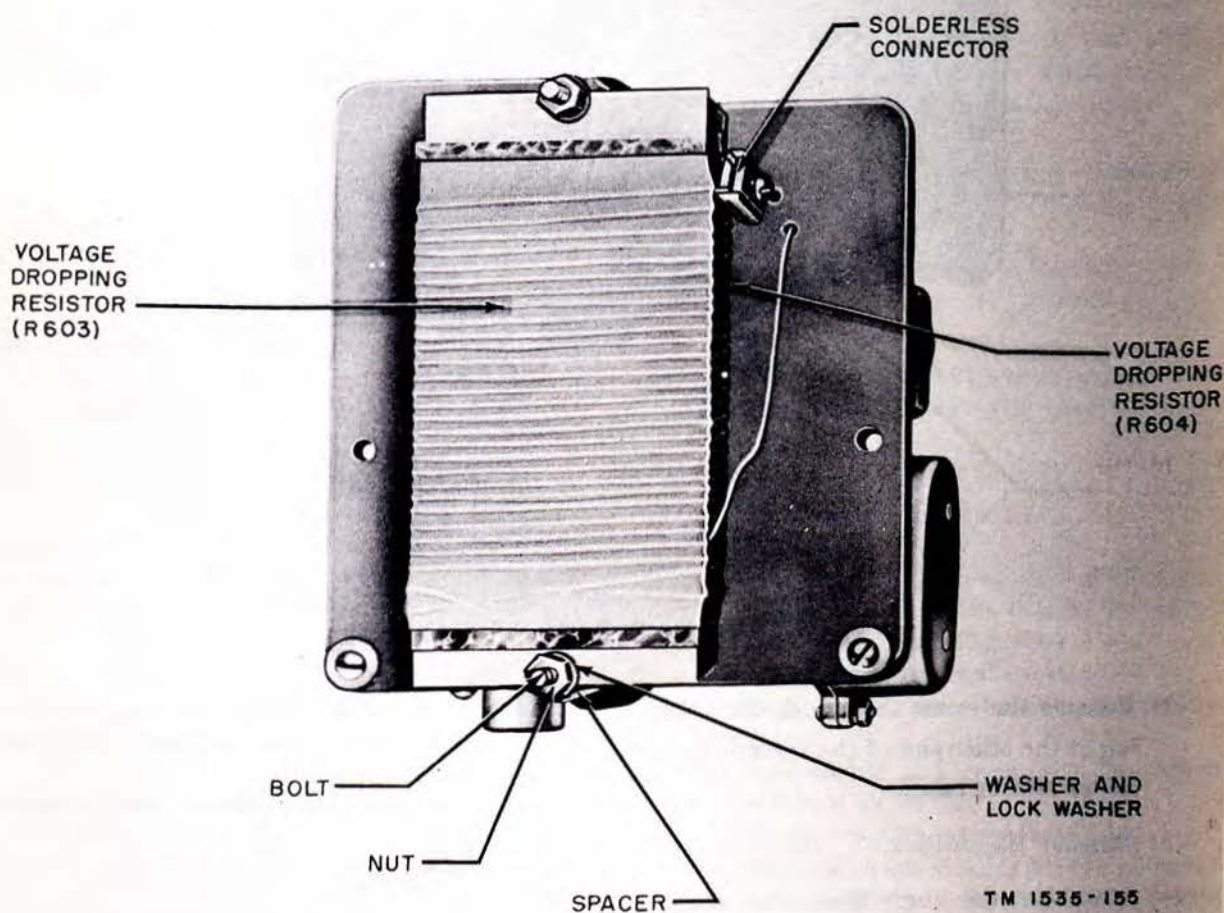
Motor Starter SA-287/SPN-11, rear view.
